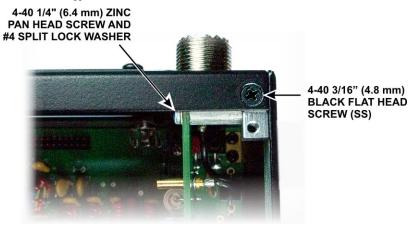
Installing KANT3/KAT3A Mounting Screw.
